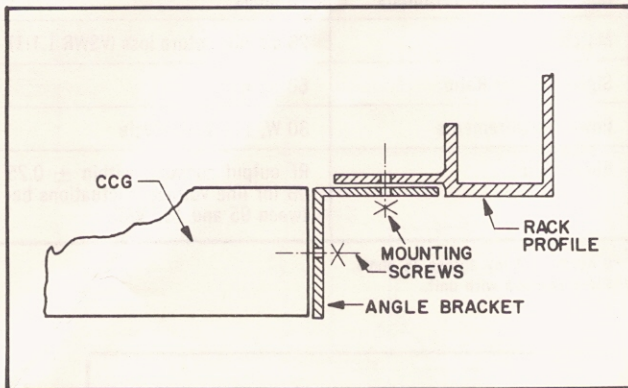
Angle Brackets installed for chassis bottom to be flush with rack front.
